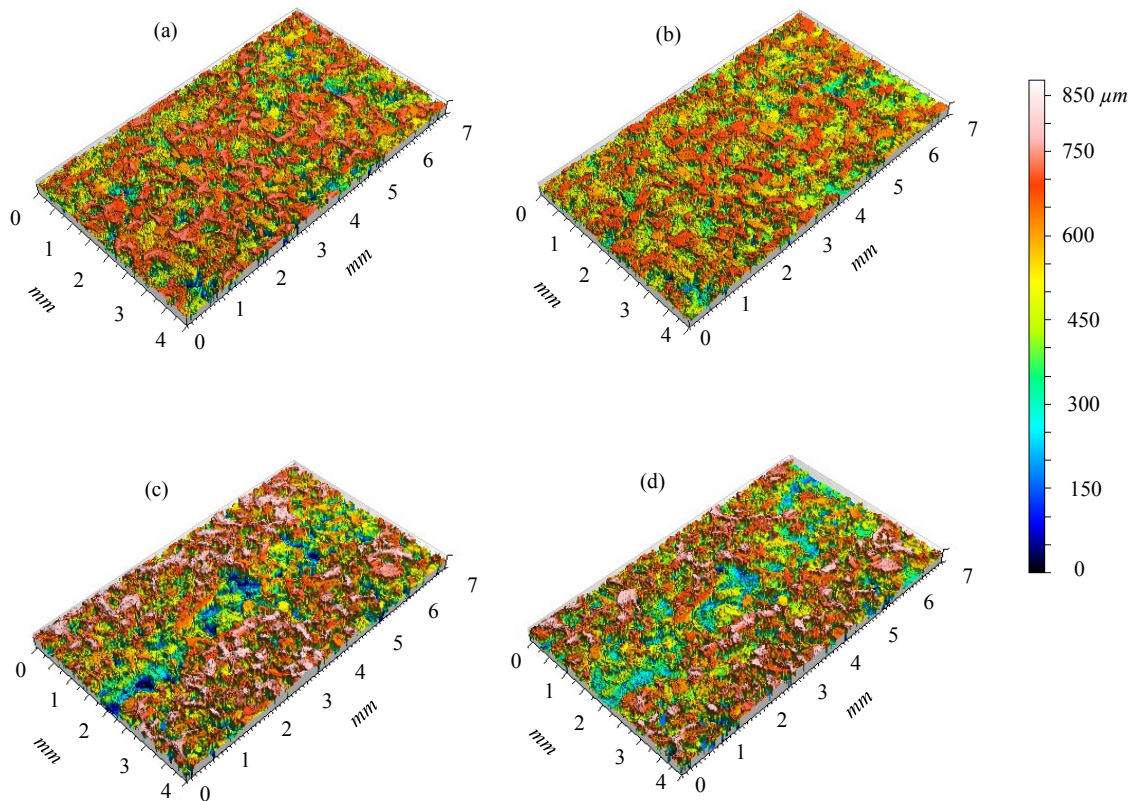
Grinding wheel surface topographies for (a) fresh non-grooved, (b) worn non-grooved, (c) fresh grooved and (d) worn grooved wheels
